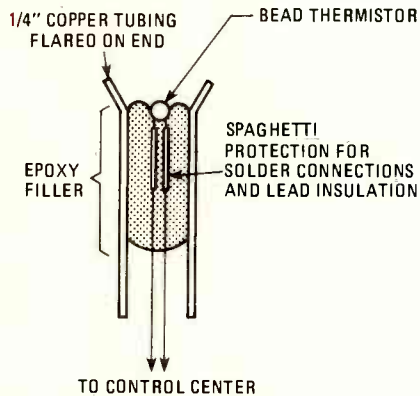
CUTAWAY DRAWING of thermistor probe. See text for construction details.
